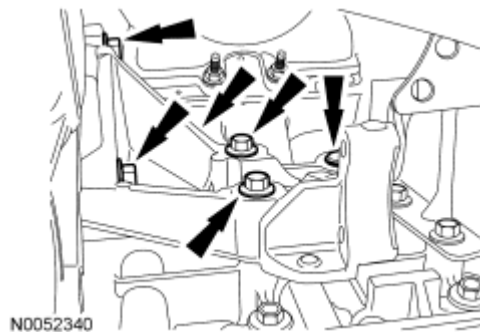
Locating Power Transfer Unit (PTU) Support Bracket & Bolts
